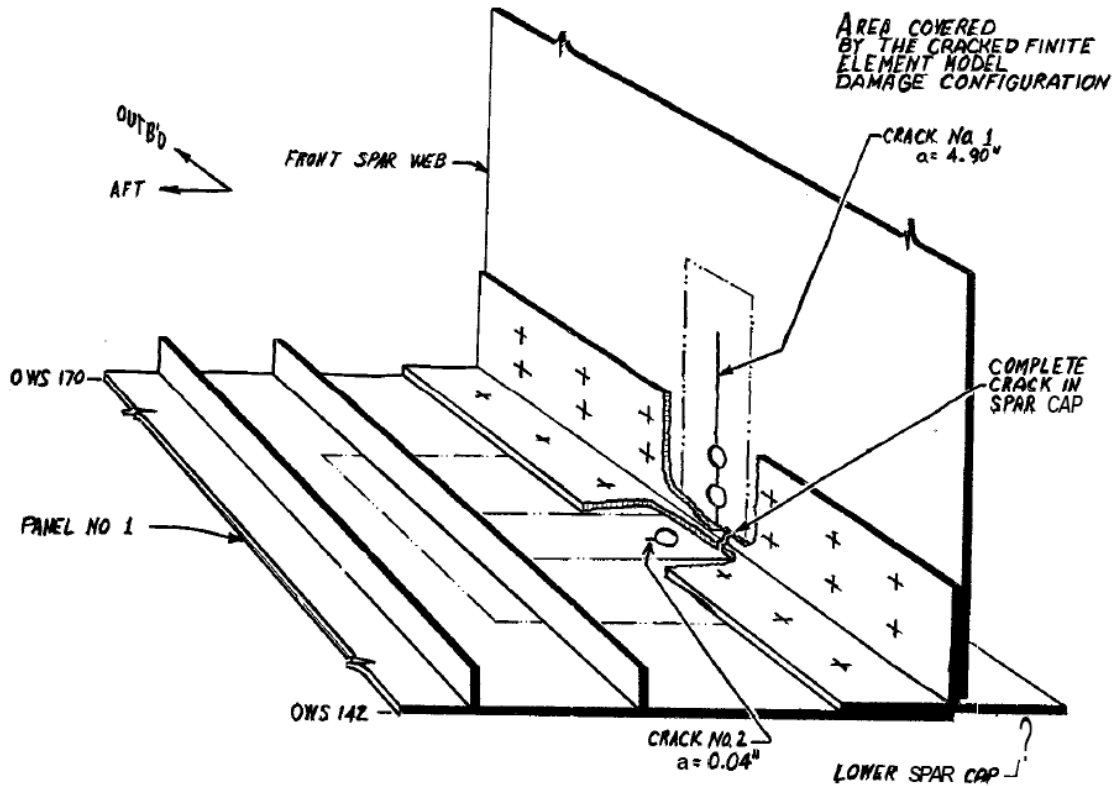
Area of Fatigue Cracks in N14ST (Courtesy NTSB)
